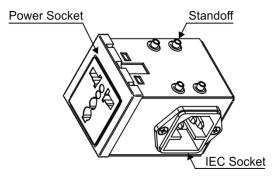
TSPB-2V1AD Universal Power Socket Housing
